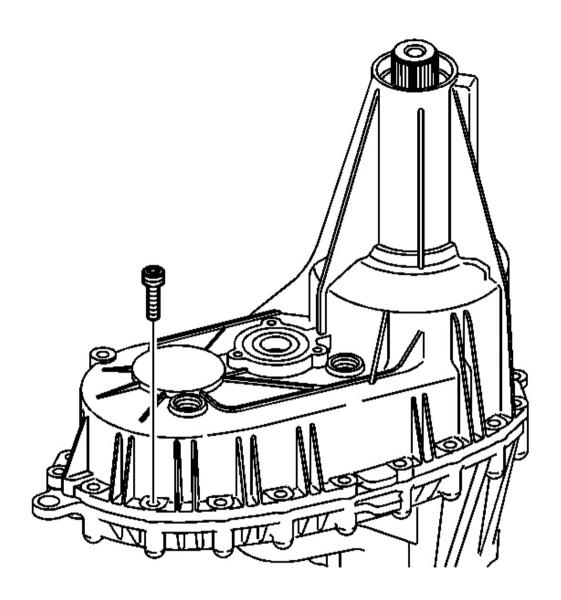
Transfer Case Retaining Bolts & Washers Courtesy of GENERAL MOTORS CORP.
